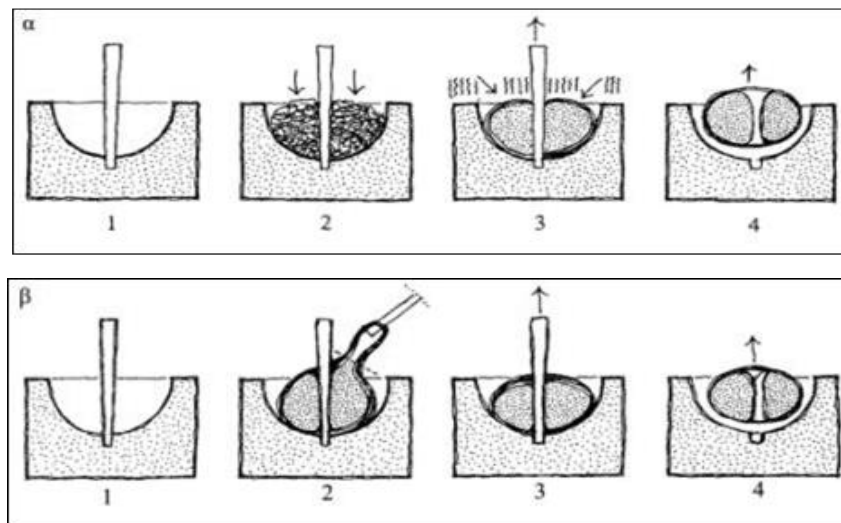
The two ways of filling the mould, above with crushed glass, below by pouring molten glass
